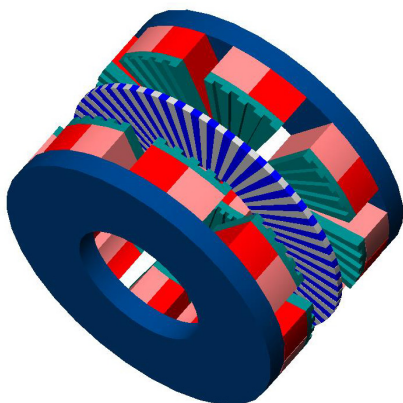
Magnetic circuit of disk stepper motor with PM disk rotor without iron yoke
